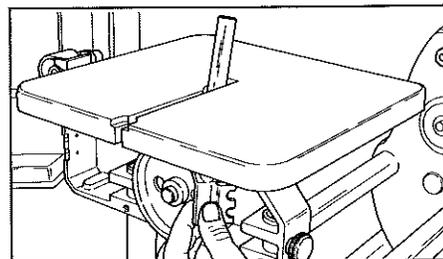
Slide the curved platen down and out through the hole in the center of the table.
